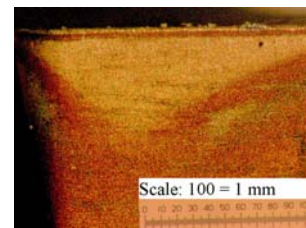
Picture showing flank wear for a dry cut after 1 minute of machining at a cutting speed of 190 m min⁻¹ and feed rate of 0.23 mm/rev with a 2 mm depth of cut [7]
